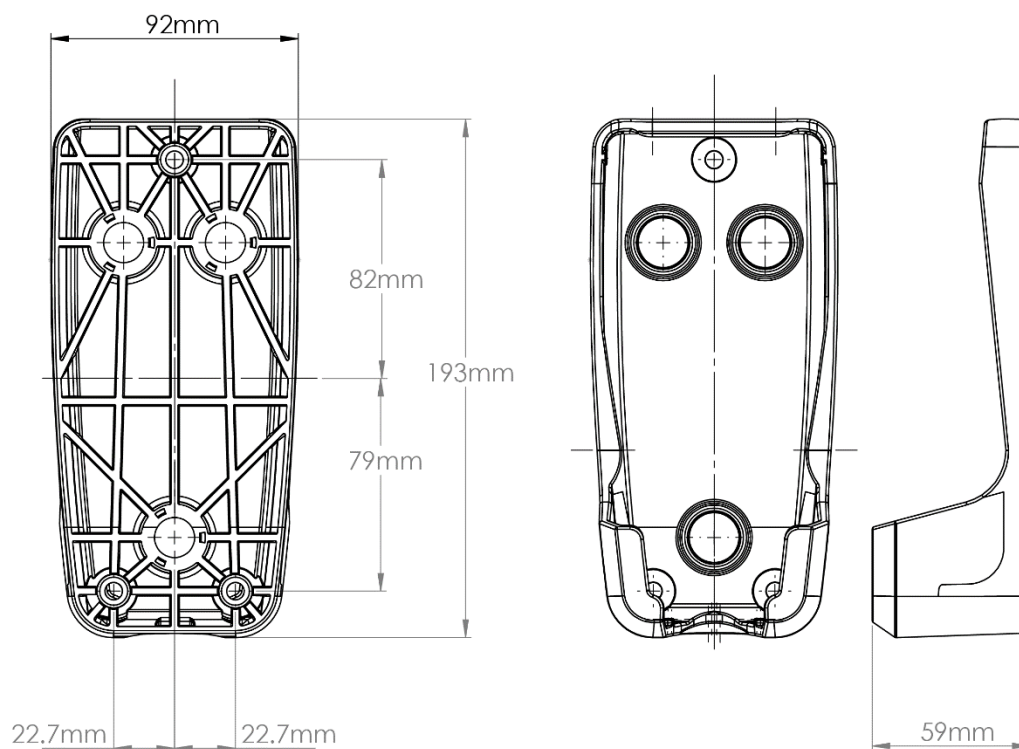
Remote Pendant Cradle Dimensions (mm)
